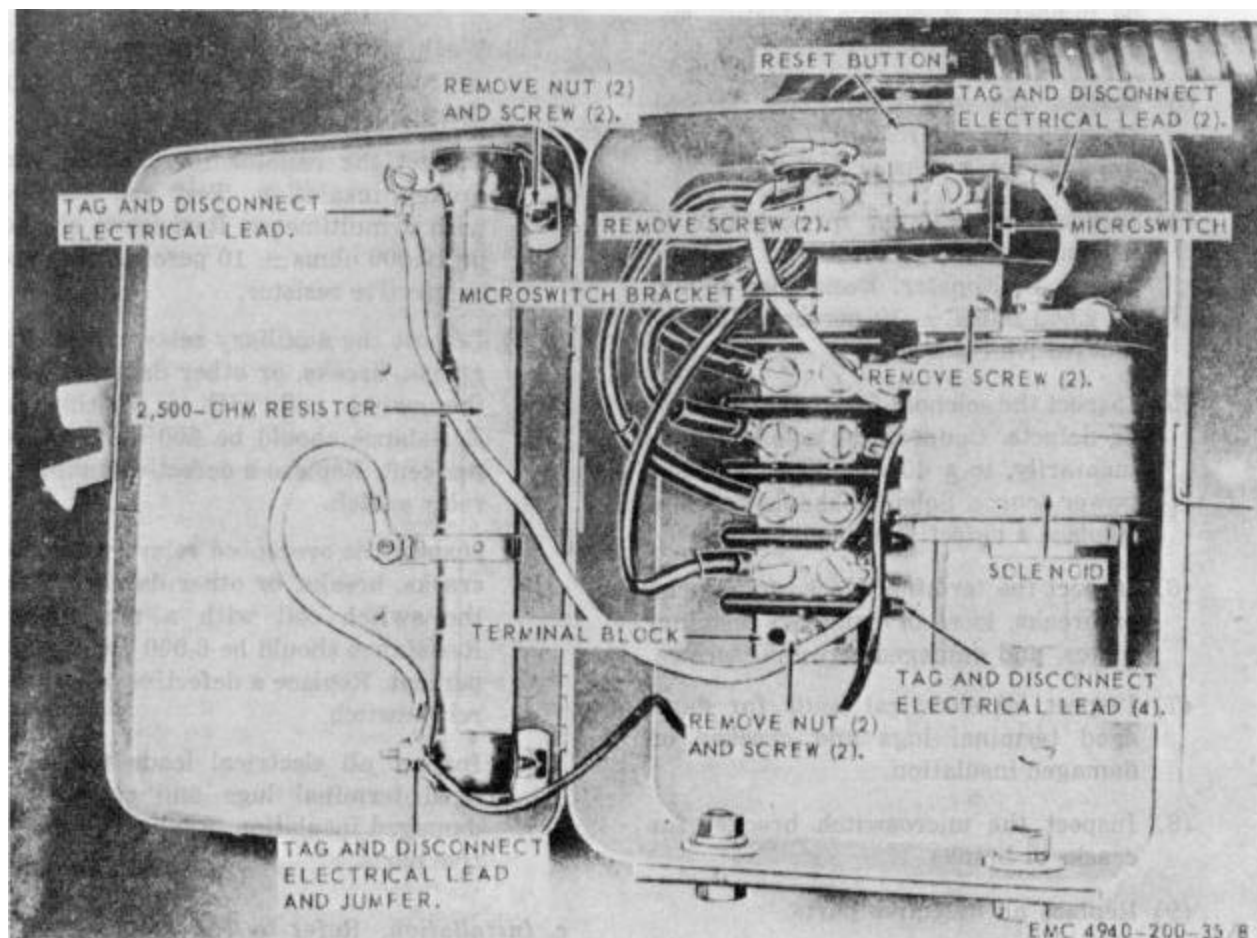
Engine overspeed relay resistor, microswitch, solenoid, and terminal block, model SECM, removal and installation.
